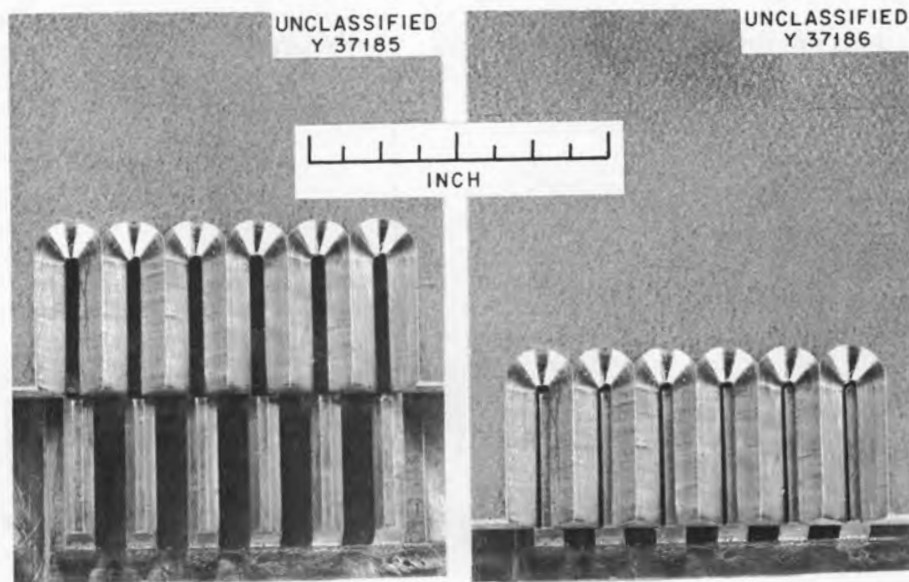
First Welded-Assembly Joint Design.
